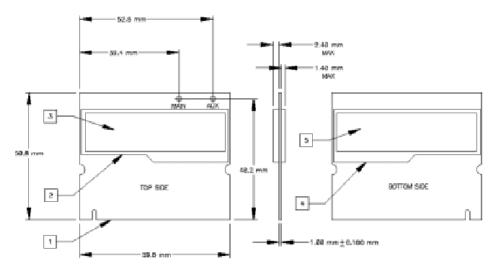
Mechanical Drawing, MiniPCI Type IIIA
